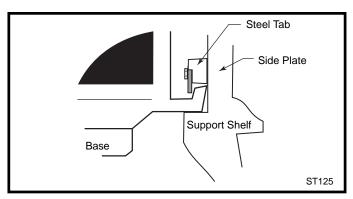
Install the Firebox Assembly. Be sure steel tabs engage ribs on base of firebox.
